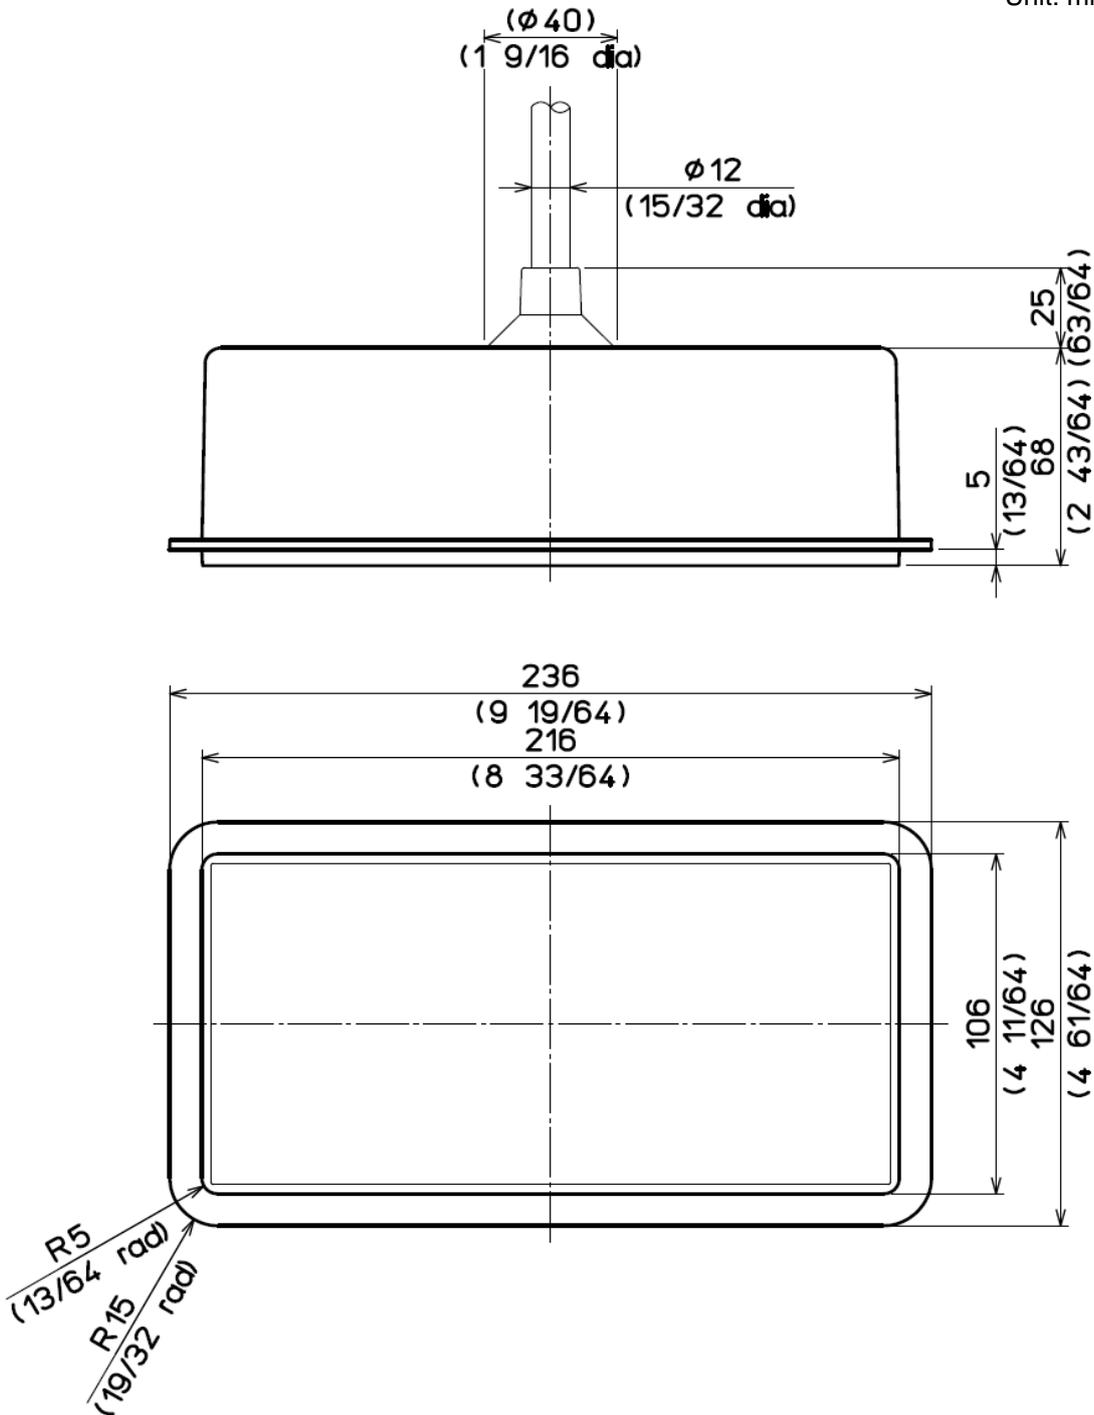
Outline dimensions of a transducer (TD361-K)
